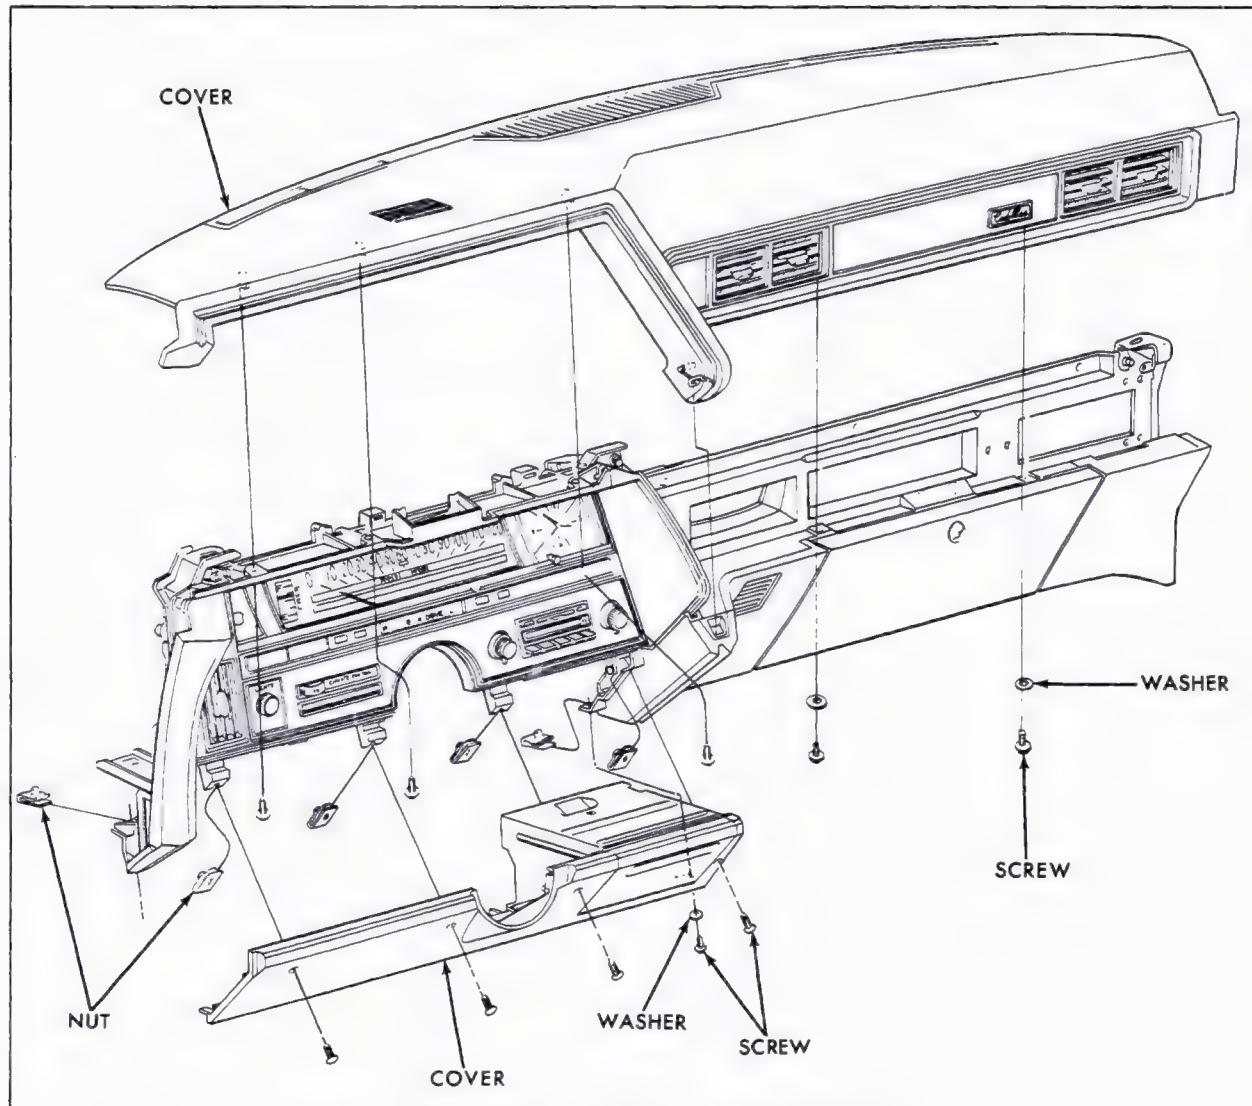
Instrument Panel - (Cover Disassembled)
